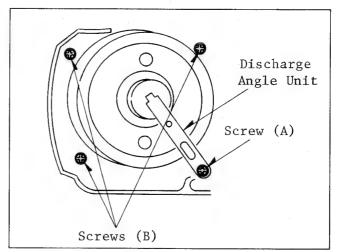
Replacement of D.D. Cylinder Unit -(1)
